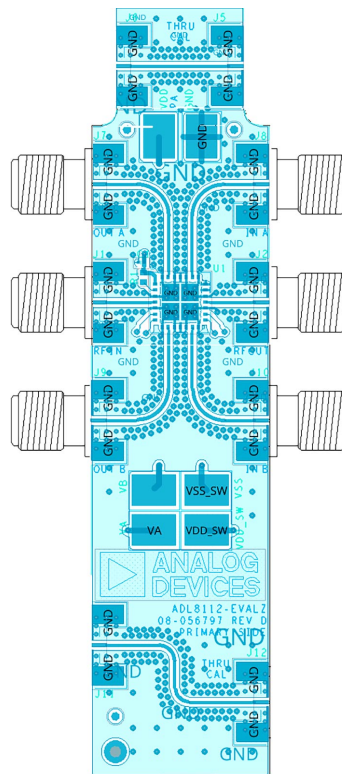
ADL8112-EVALZ Assembly Drawing (J5, J6, J11, and J12 Are Not Installed)
